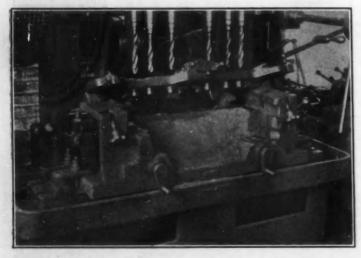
CYLINDER-HEAD FIXTURE FOR DRILLING SPARK-PLUG HOLES Notice the Permanent Stops and the Equalizing-Cam Arrangement in the Bushing Lid for Locating the Work from the Combustion-Chamber. The Hole on Each End is Drilled with the Combination Drill and Reamer and Used for Locating Purposes in all Other Operations. Notice Also How the Surfaces Are Sloped Away from the Locating Point To Prevent the Accumulation of Chips
